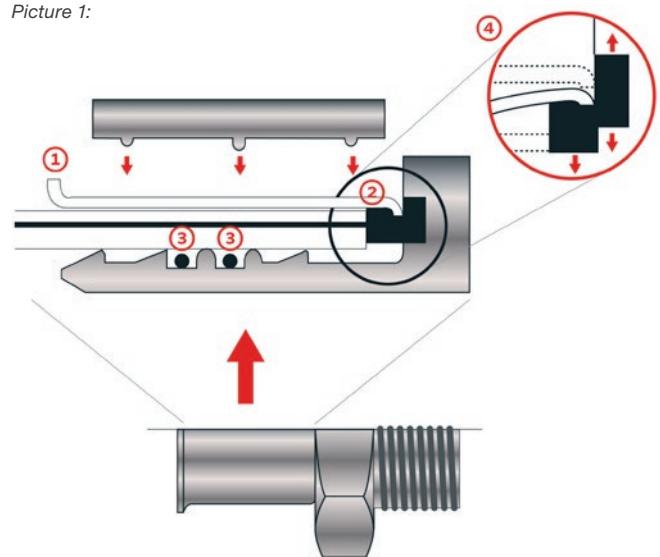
Stainless steel cup ① is attached in adjustable placement ②, which is adapted to the shape of the pressing jaw in the process of pressing and its connection with fitting remains impermeable for penetration of humidity (from the plastering or condensate). Two sealing o-rings ③ ensure perfect sealing of the inner space of the fitting against the pressurized water. The inner space of the fitting is thus protected against humidity thereby successfully preventing potential corrosion of the Al layer at the cut of multi-layer pipes.
